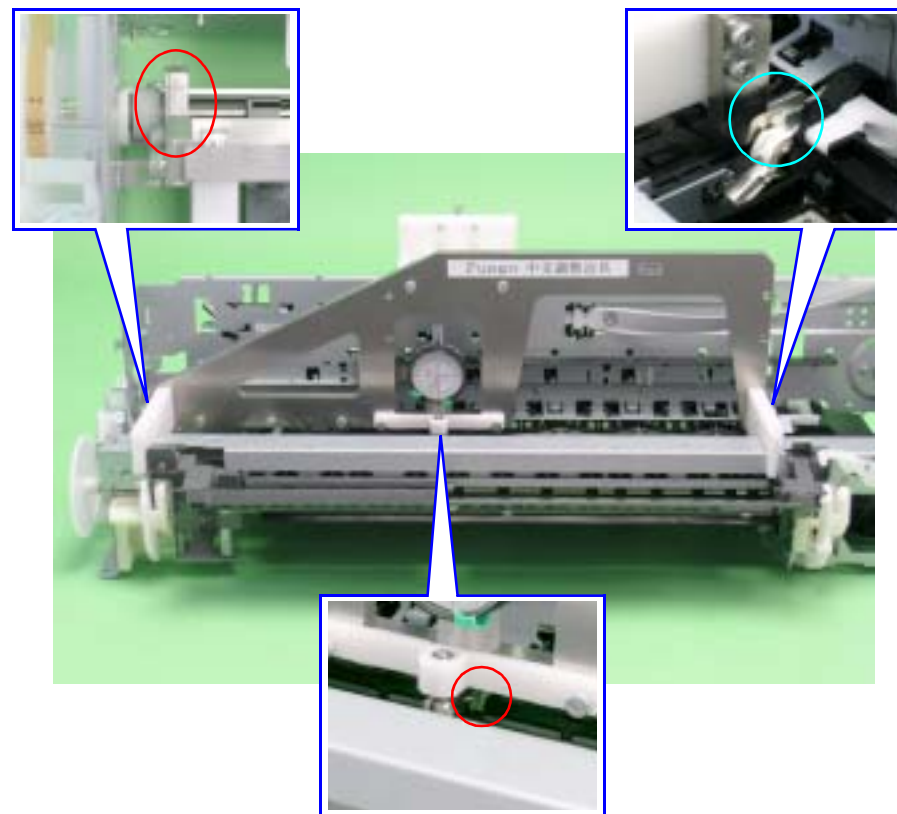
Setting the PF Roller Shaft Position Adjustment Jig (2)
